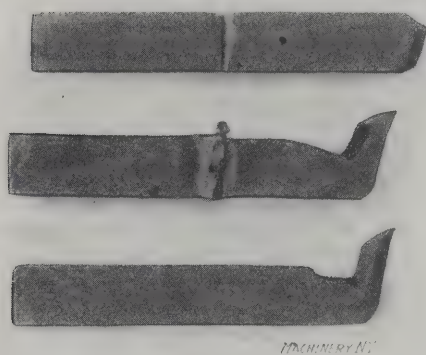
Diamond-point Lathe Tool made with High-speed Steel Cutting End electrically welded to a Mild Steel Shank. Courtesy of the Thompson Electric Welding Co.
